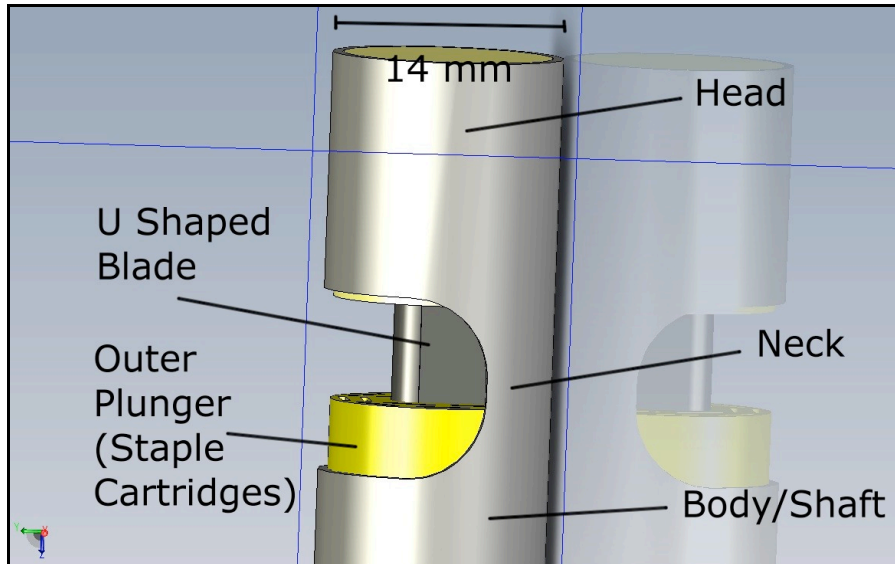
Design drawing: The side of the prototype instrument illustrating the mouth and neck of Prototype Instrument 3
